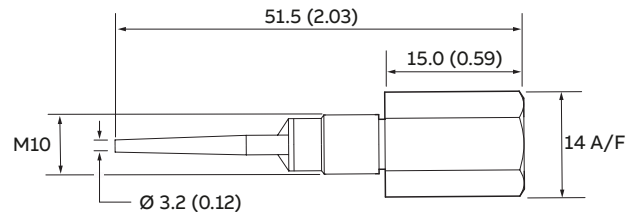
Screw-in T-piece assembly – BSP/NPT
